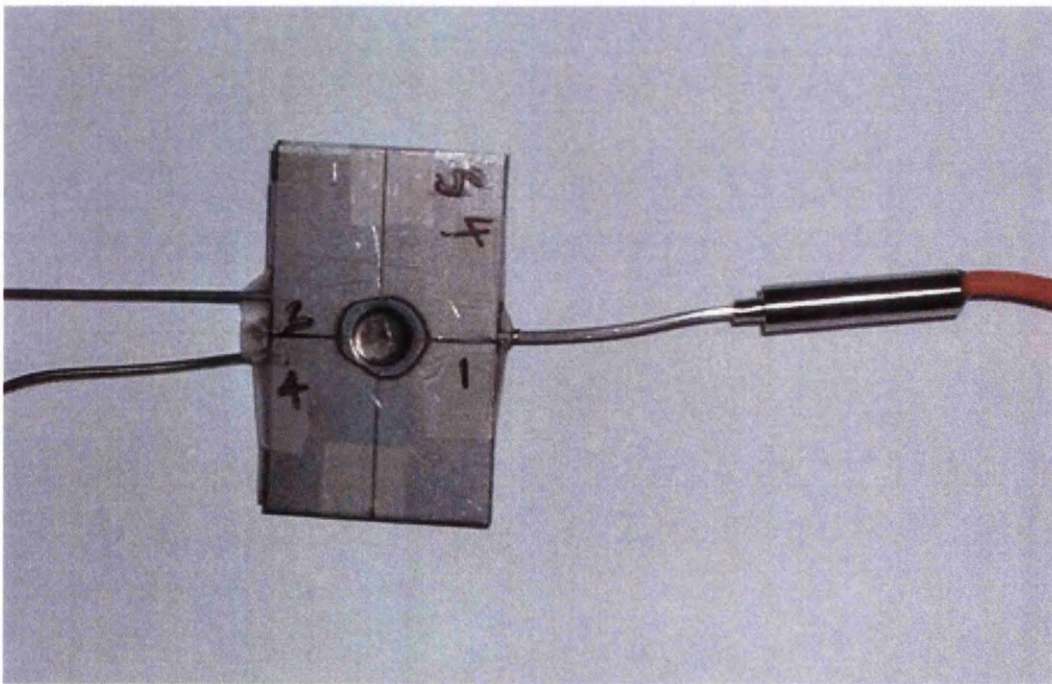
Photograph of a sample with sheathed thermocouples attached. Extra tape was used to maintain alignment of the two halves of the sample prior to welding.
